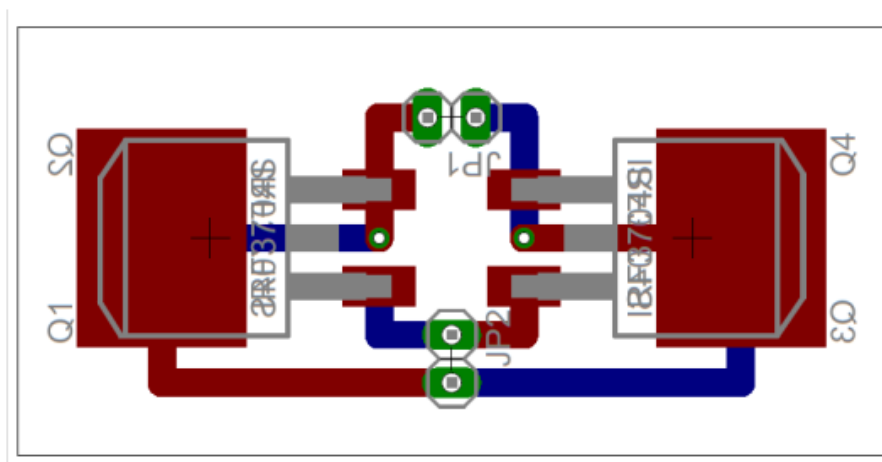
PCB 4 Geometrically Balanced PCB artwork
